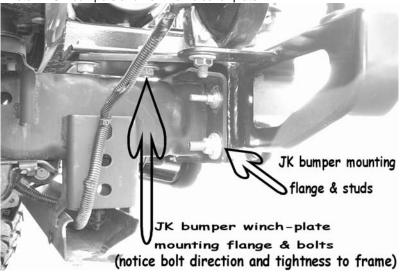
Front bumper mounting flange & studs - Winch plate mounting.
